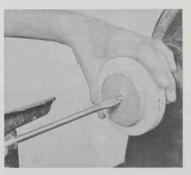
Mounting small wheel on a wood blank fastened to faceplate.
